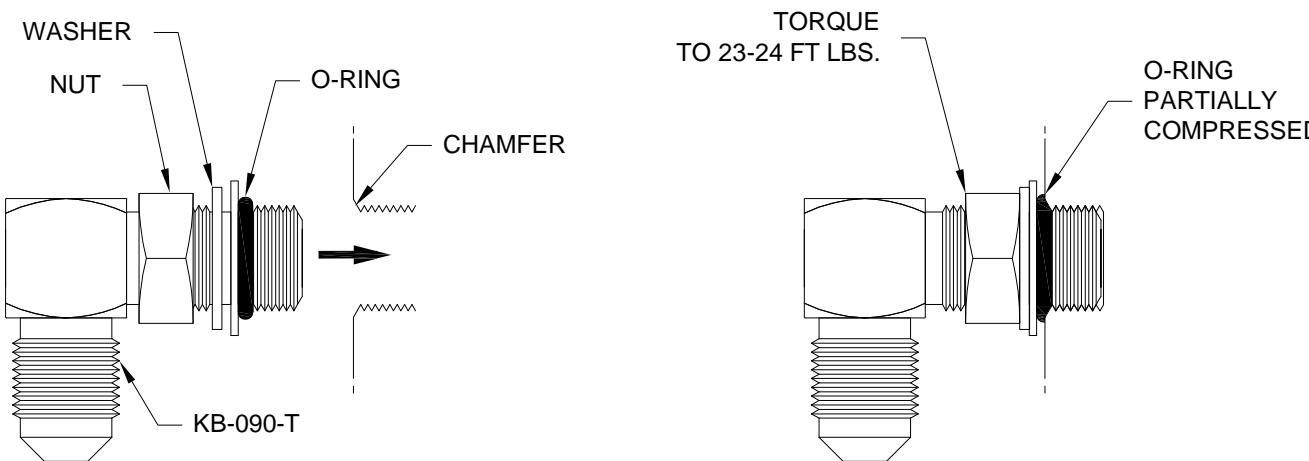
ELBOW-TYPE STRAIGHT THREAD FLUID FITTING
